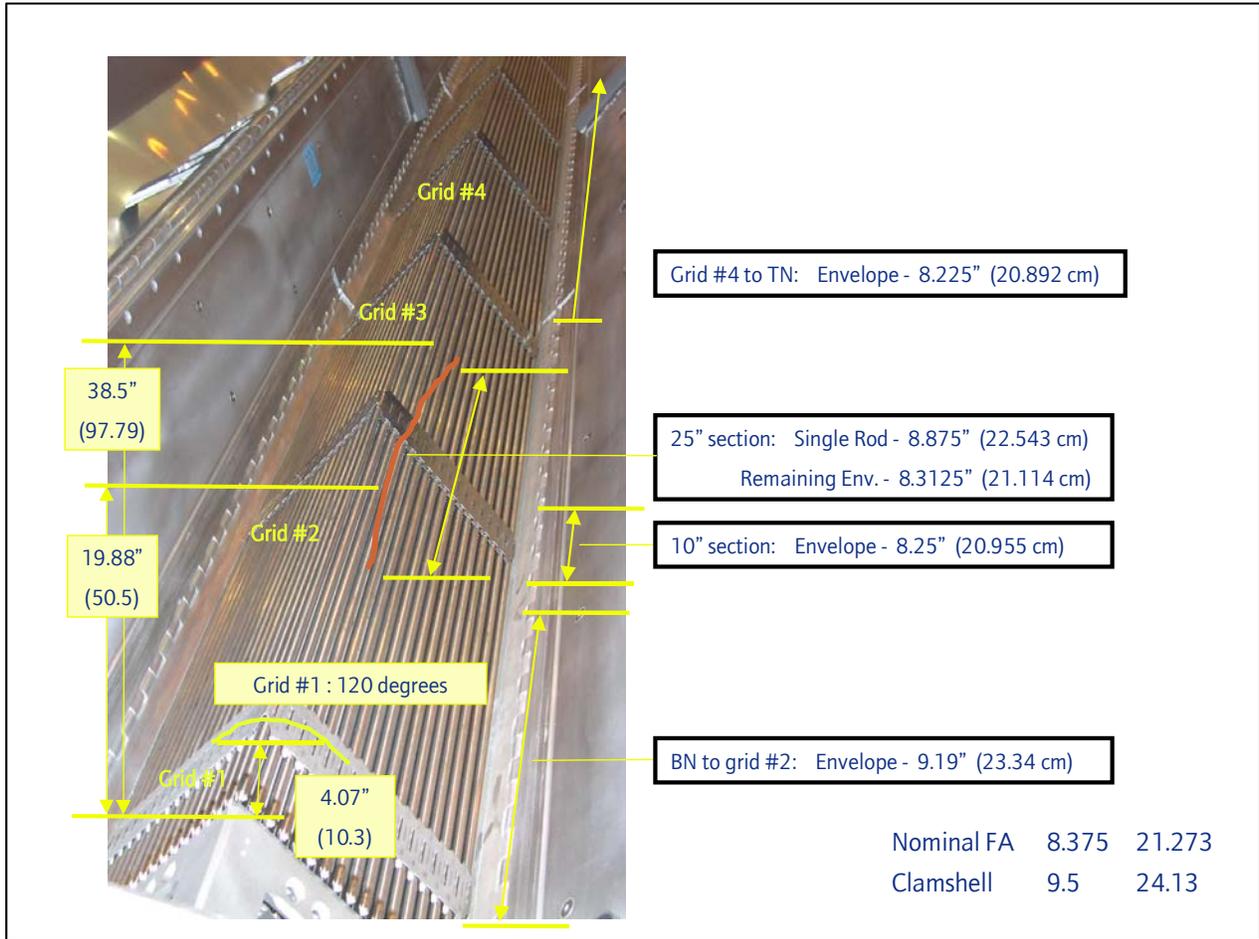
Fuel assembly Damage Sketch and Pre-test Assembly
